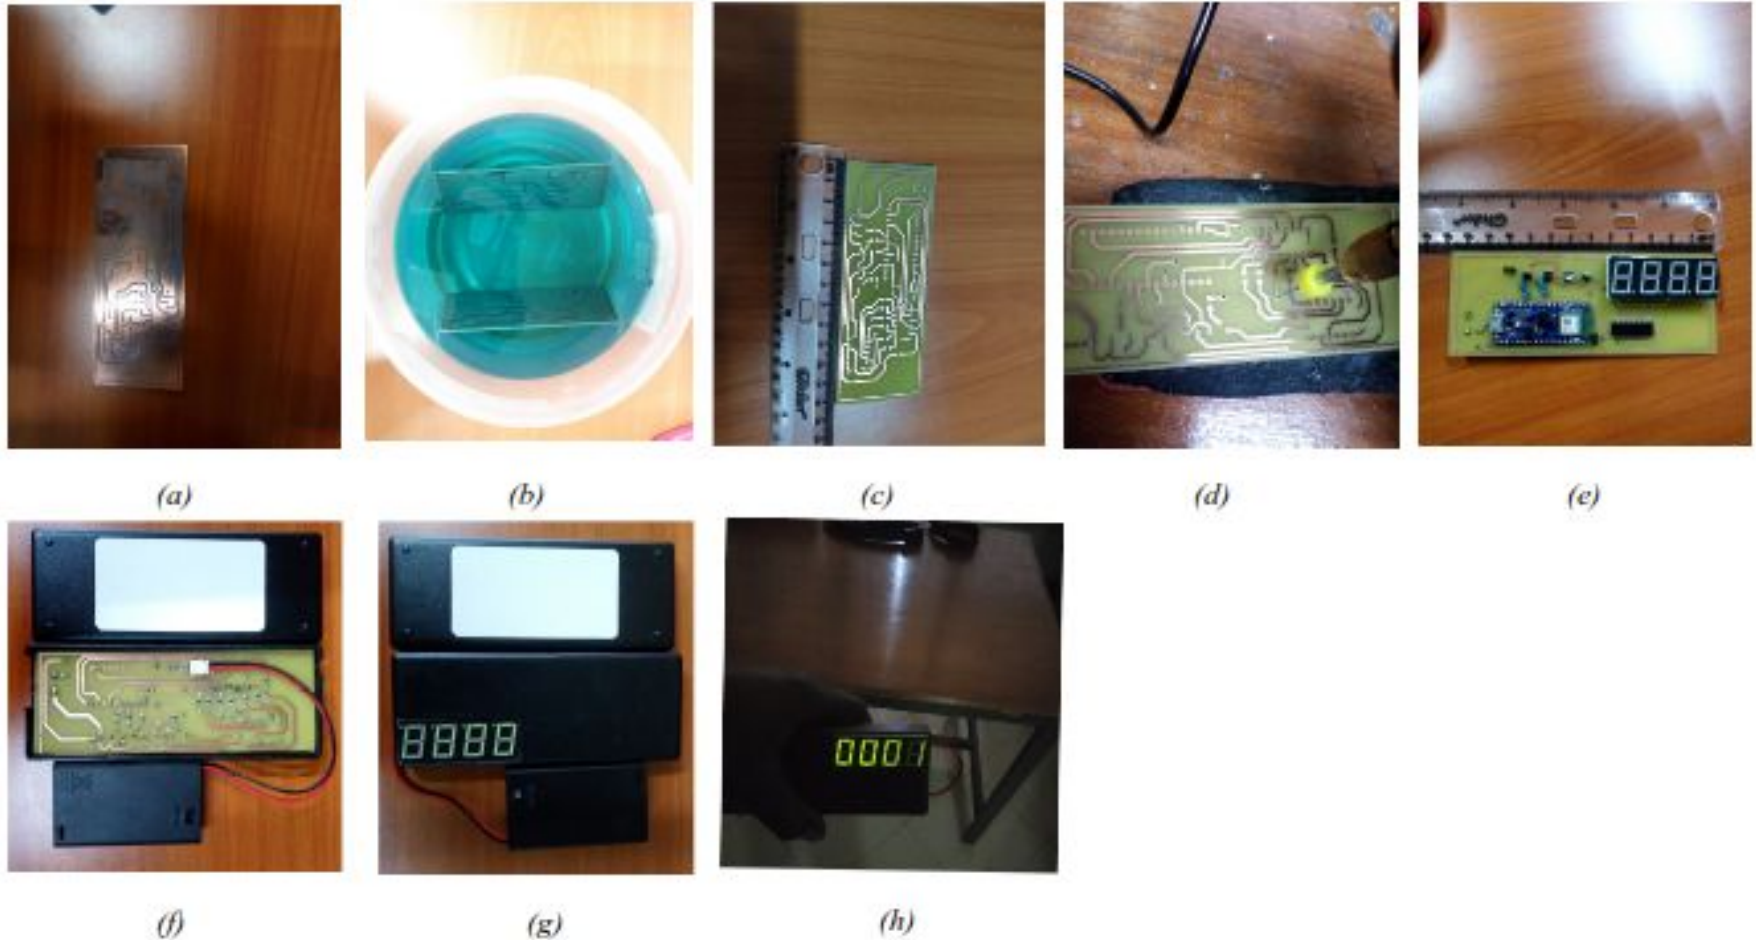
Printed circuit transfer on PCB (a), etching with sodium per-sulphate solution (b), etched PCB board (c), drilling through holes for components (d), mounted components and Arduino board (e), assembled and powered (4.5V) (f), counter display (g) and testing of the system with peripheral devices (h)
